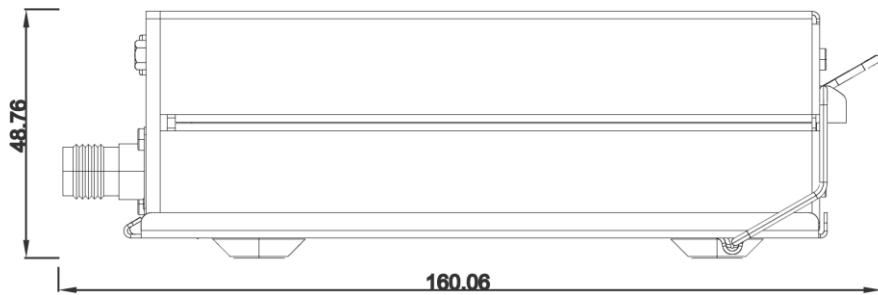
SV-XPNDR-26X Dimensions with Mounting Tray (dimensions in millimeters)
